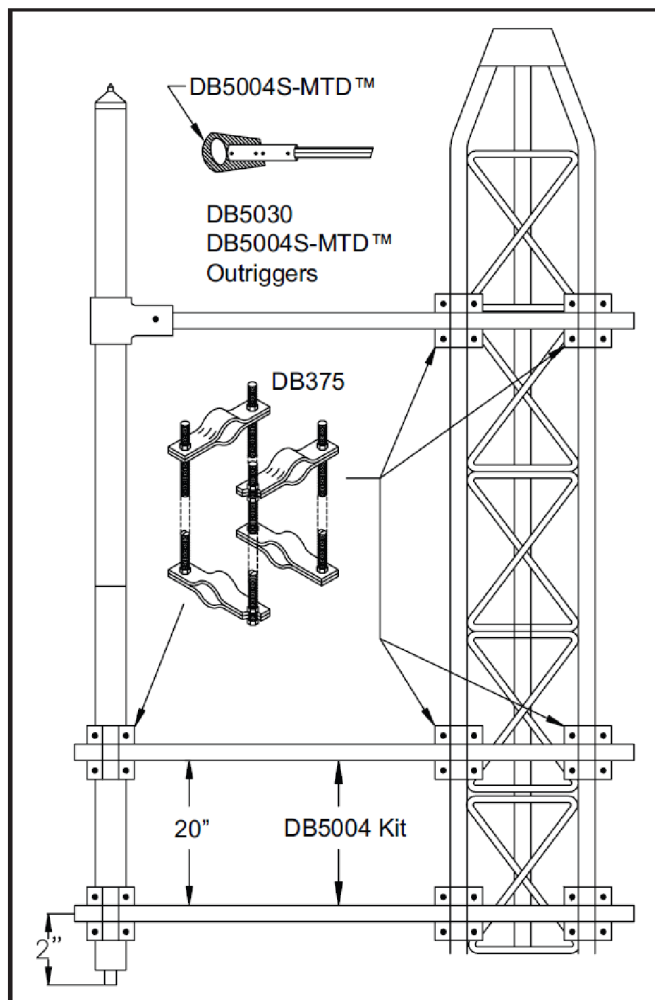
Example of Antenna Showing DB5030 Series Fiberglass Outrigger Assembly and DB5004 Adjustable Side Mount Kit.
